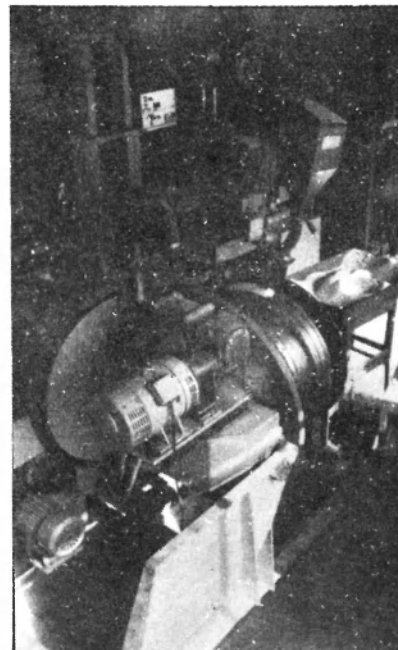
Modification in SAW set up for production of shape welded component
